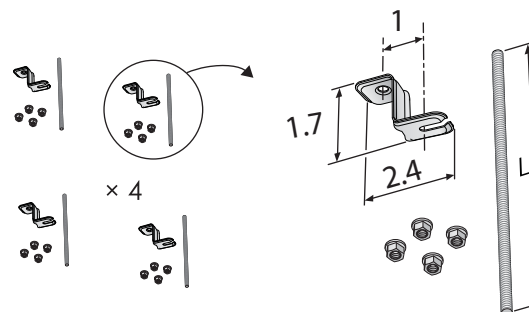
Assembly piece SYST MS-1, ceiling mount and threaded rod.
